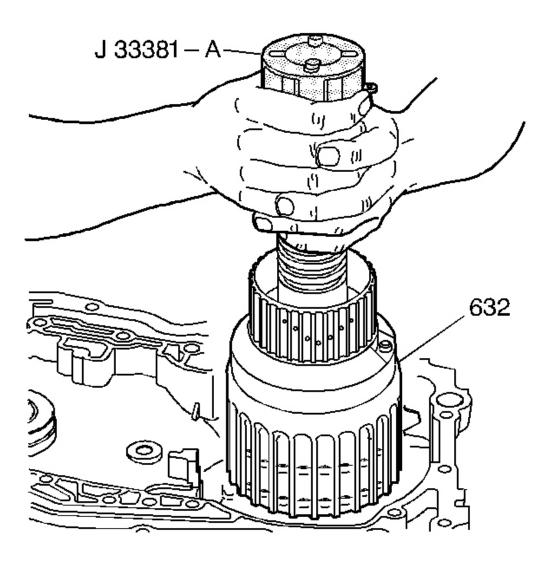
Installing J 33381-A Into Input Clutch Housing Courtesy of GENERAL MOTORS CORP.
